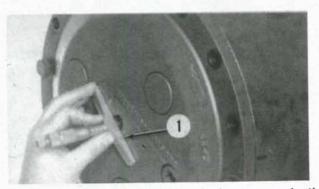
To check axle shaft end play, use a depth micrometer (1) to measure distance from carrier surface to thrust plug. Refer to text for adjustment procedure.
